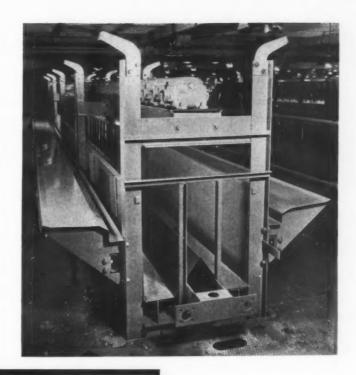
Below — Process reel gear box with top removed. The two right-angle take-off shafts are coupled to inclined bevel gear shafts behind the process panels in Fig. 10. This box may be clutched off the drive shaft and lifted out without shutting down any positions except the two served by its own output shafts
